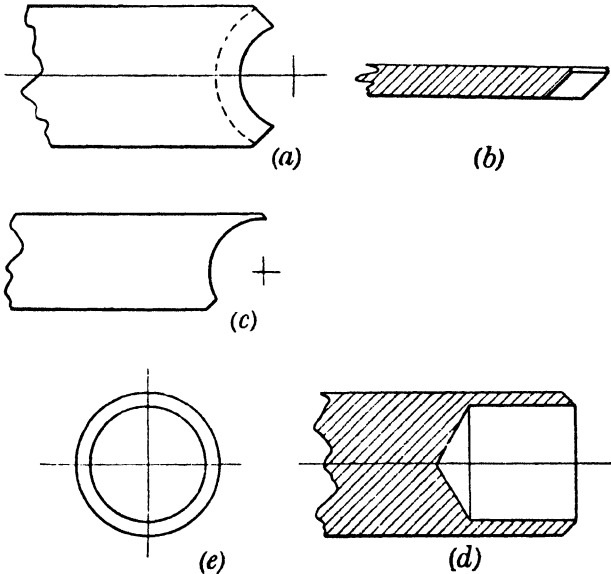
Tools for turning spheres: (a) hole drilled in file, (b) sectional view showing countersink, (c) modified for cutting a bead, (d) section of tool made from bar, (e) end-view of (d).
